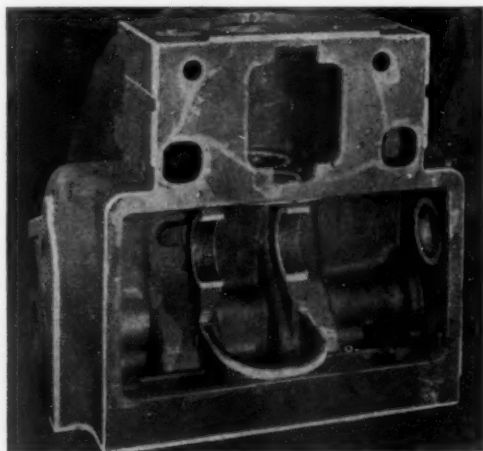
VIEW OF INTERIOR OF TRANSMISSION CASTING SHOWING VARIOUS BEARINGS AND CLEAN CUT DESIGN.
